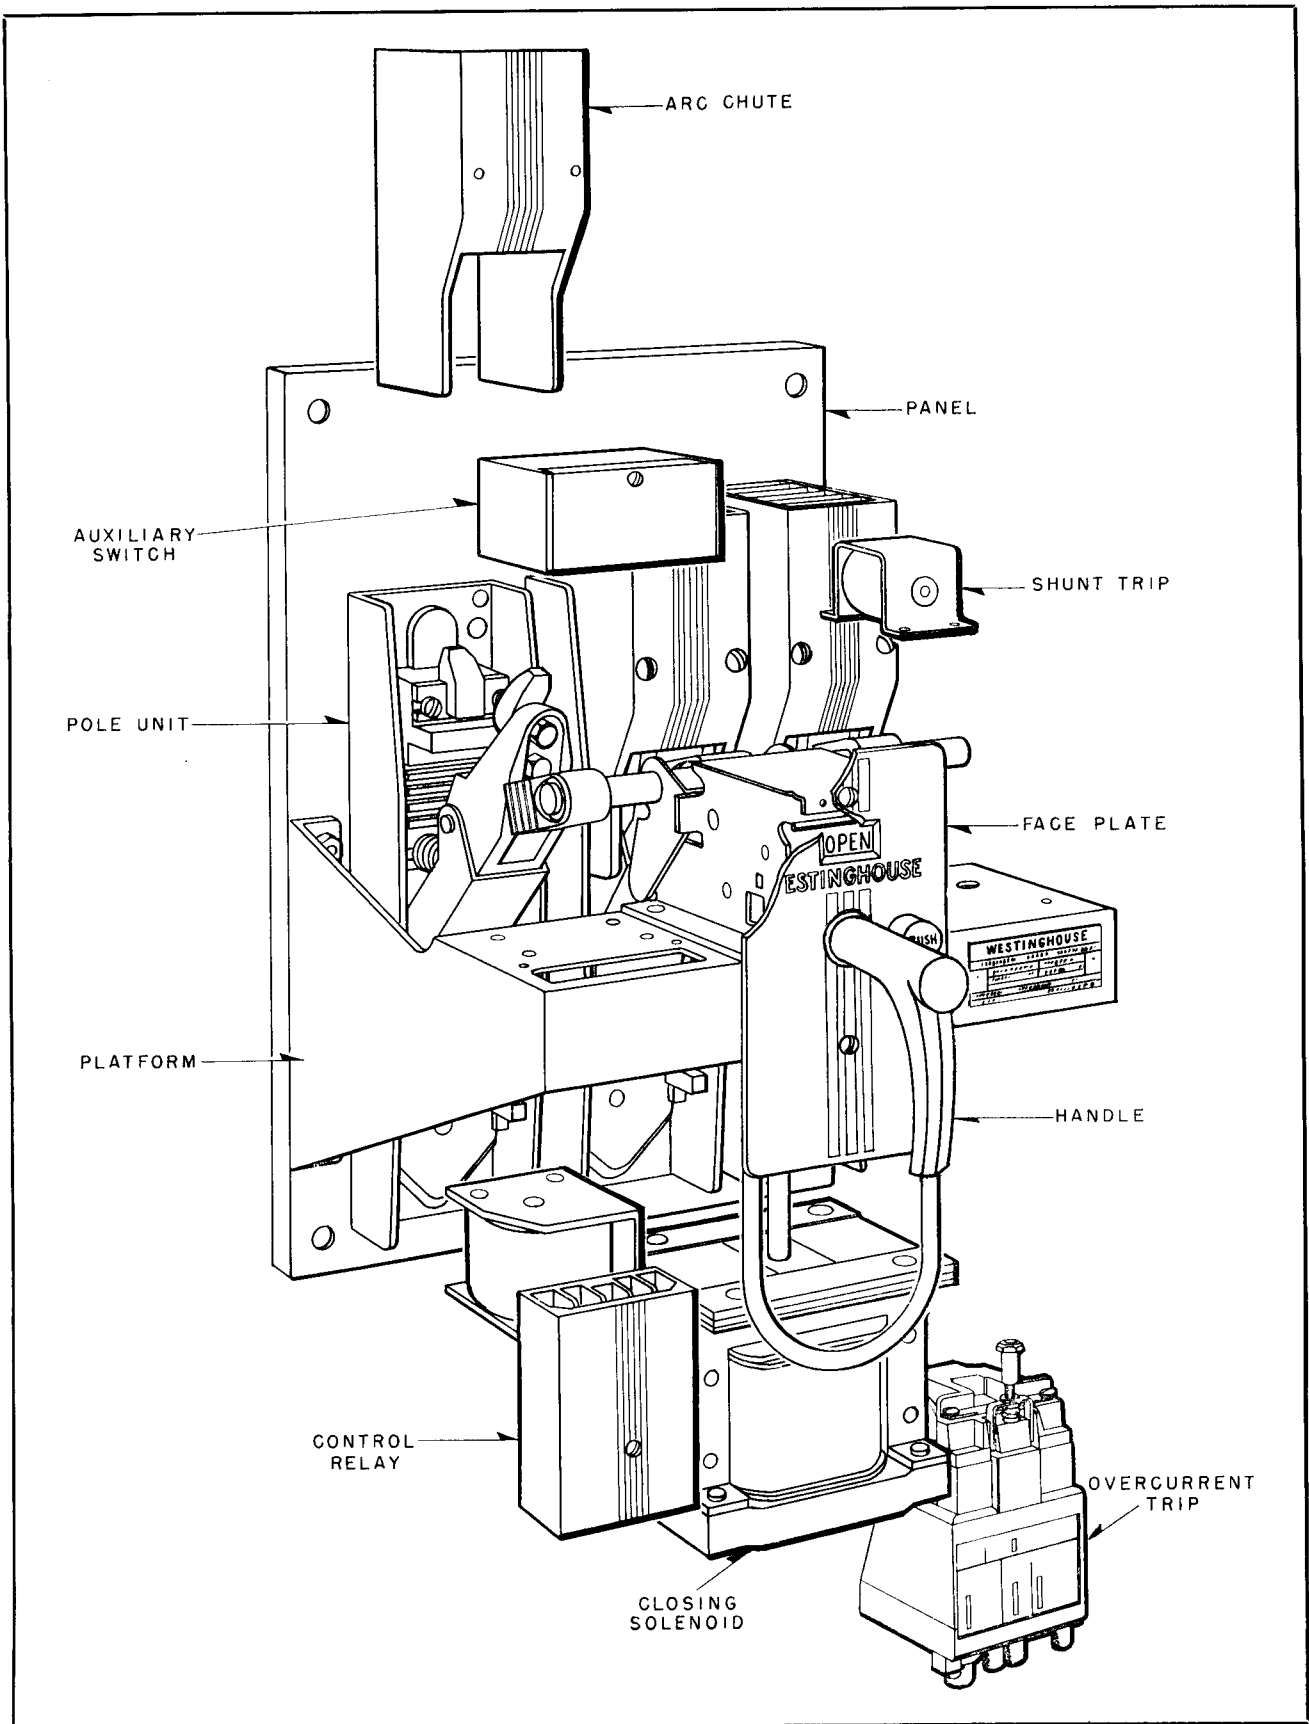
Type "DB" Air Circuit Breaker—Exploded View
